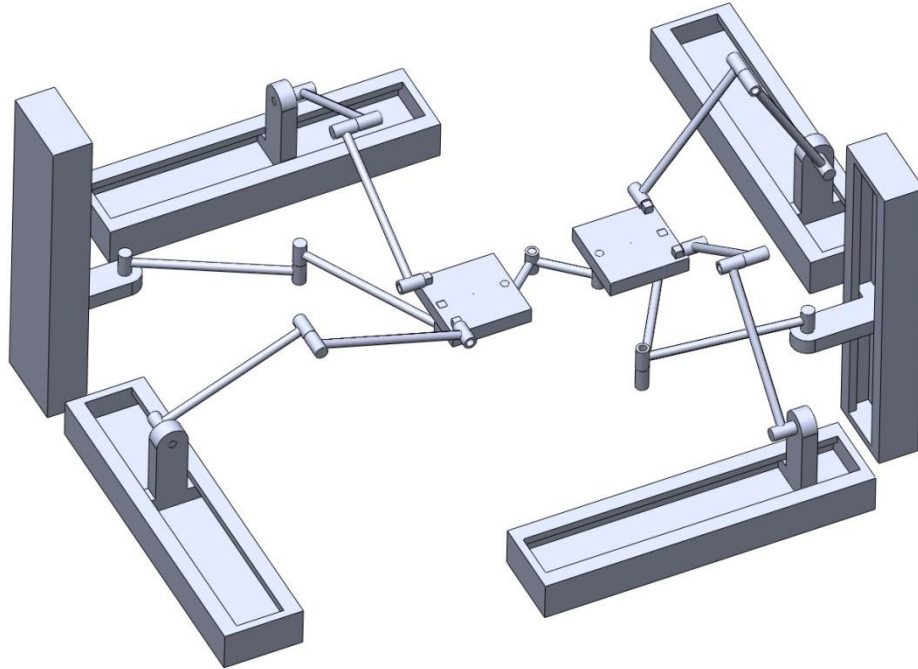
5-DOF Parallel Mechanism Design 2 assembly with single *RRR* moving platform link.
